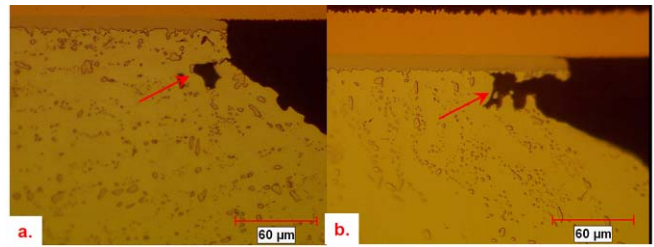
BGA solder crack initiation after -55 to 125°C ATC in solder joints formed with SAC305 solder balls and a) Sunflower and b) Sunrise
